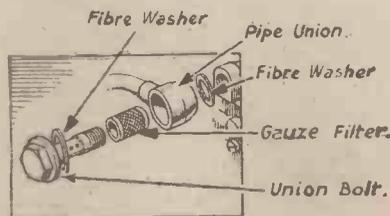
The petrol filter for the carburettor is generally fitted in the inlet union.
